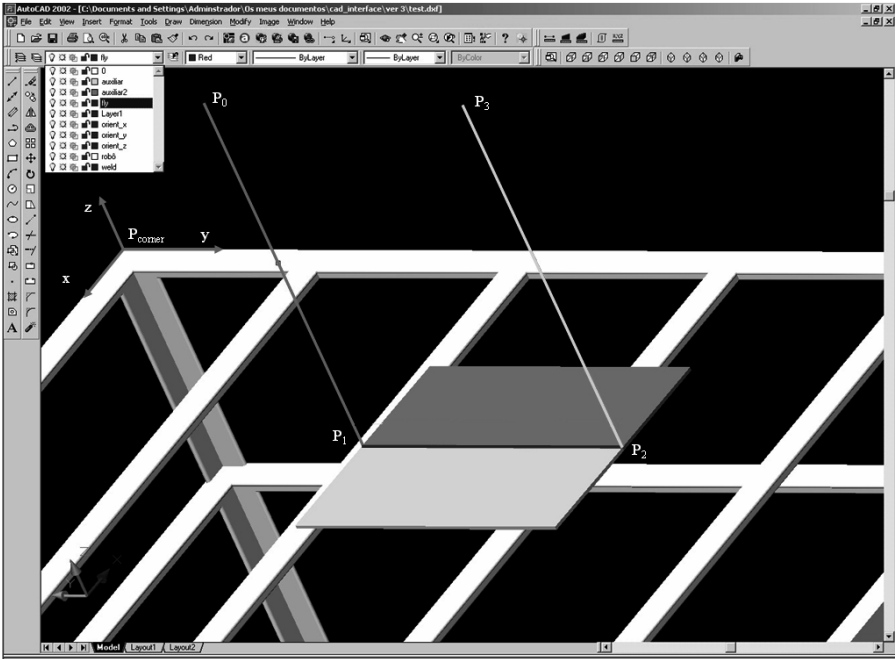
Definition of the simple welding example using AUTOCAD
